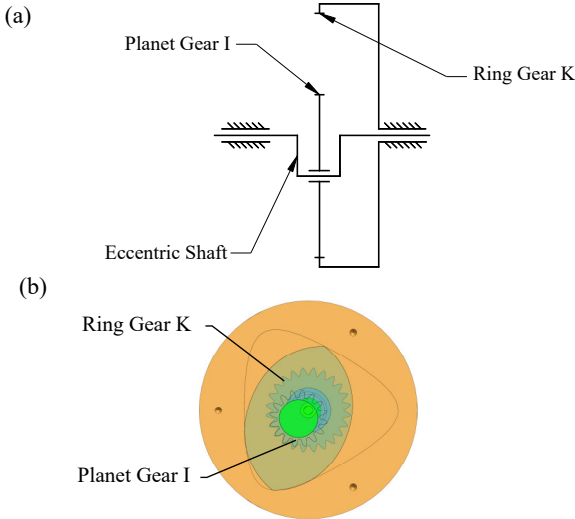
(a) The outline of the planet gear set. (b) The planet gear set in the motor.
